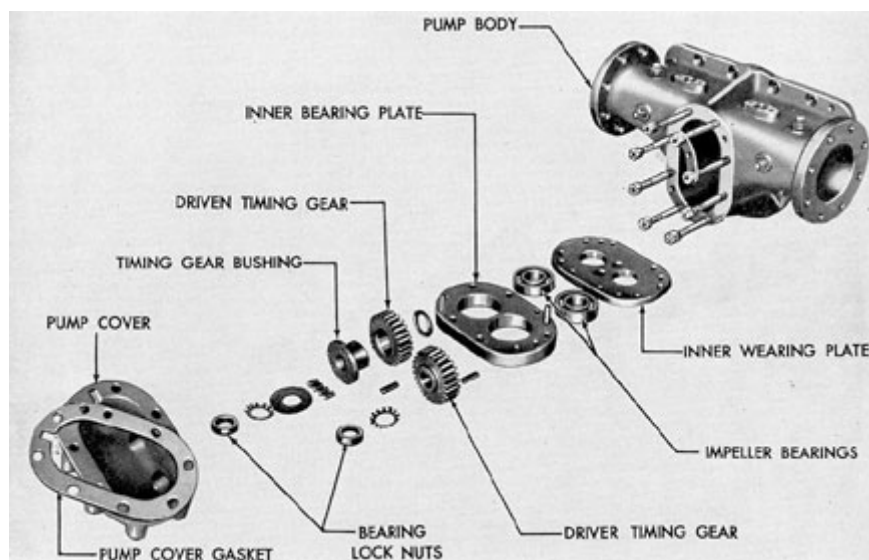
Gear end of attached lubricating oil pump, F-M.
